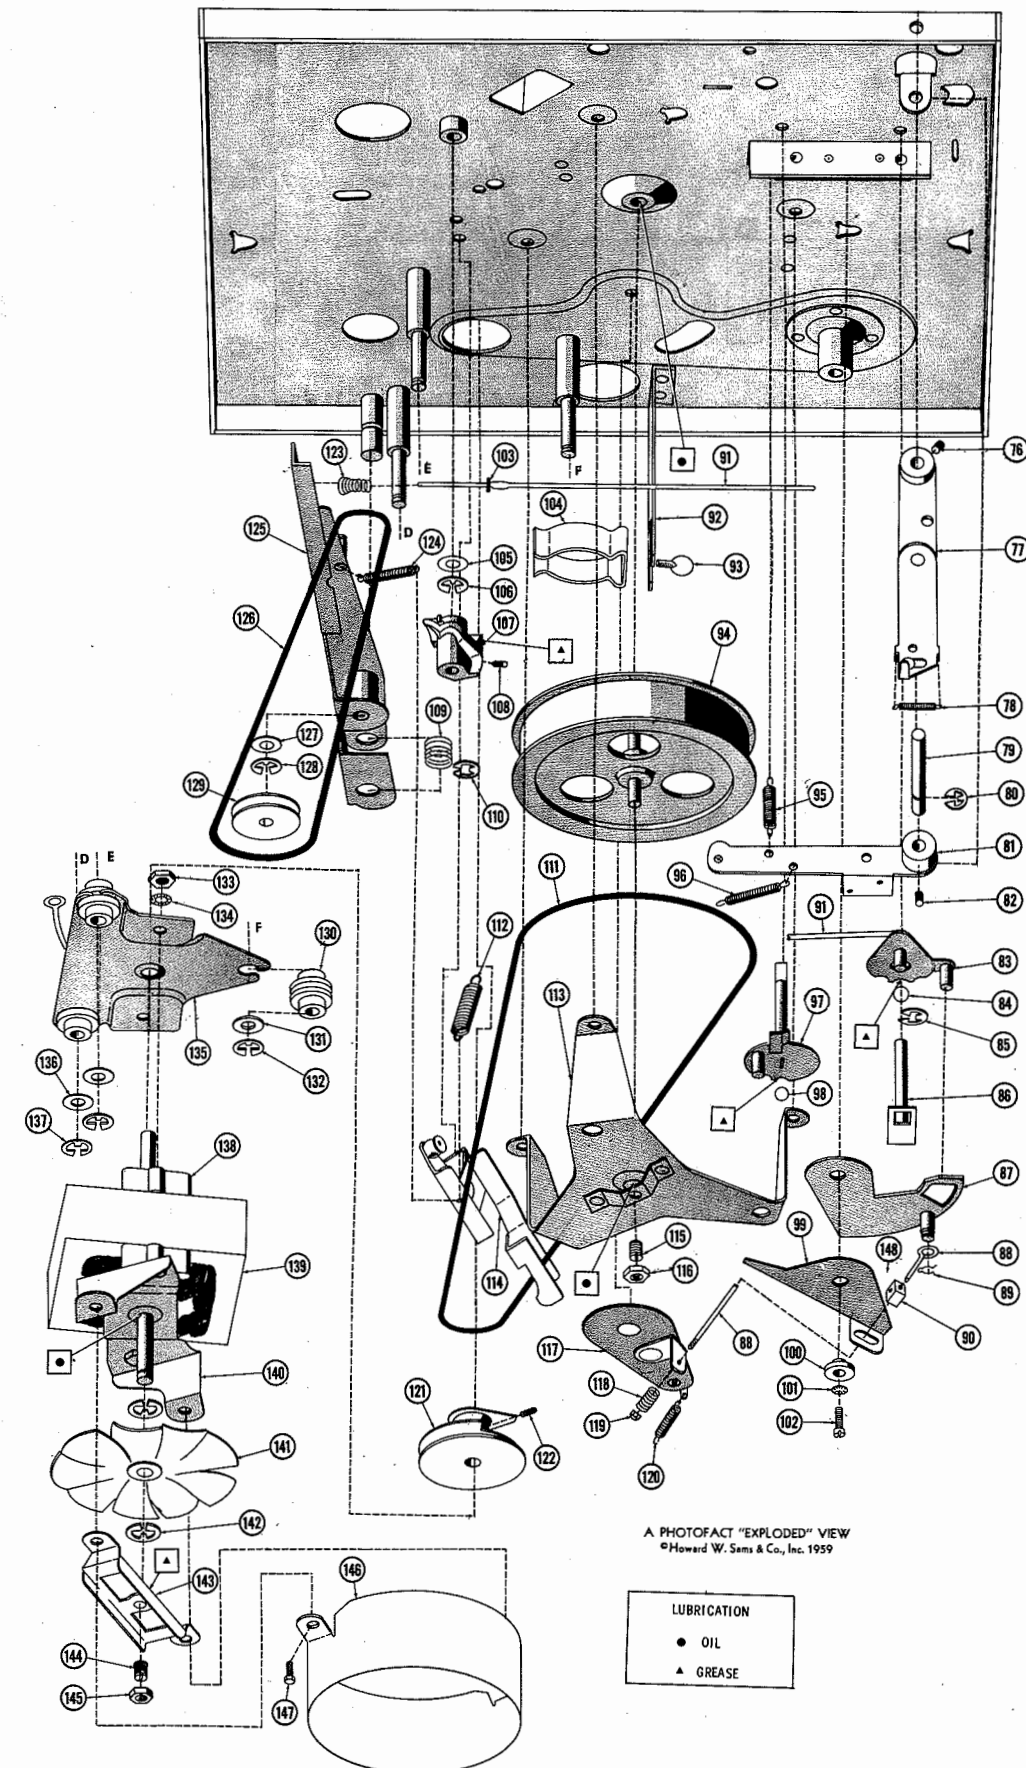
B EXPLODED VIEW OF PARTS BELOW BASEPLATE
